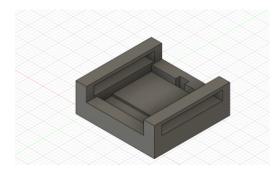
3D mount for vibration motor and haptic motor driver.
